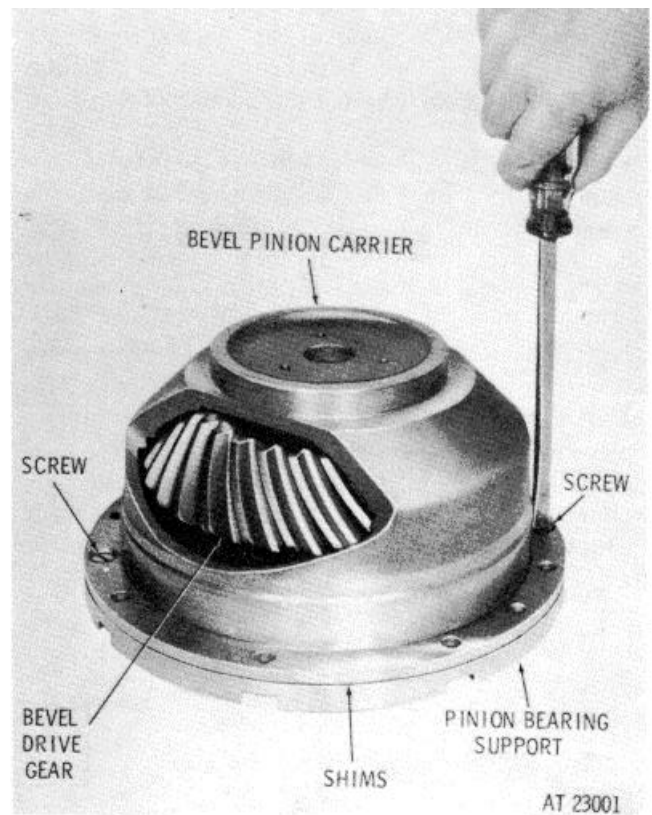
Removing(or installing) bevel drive gear assembly screws.
